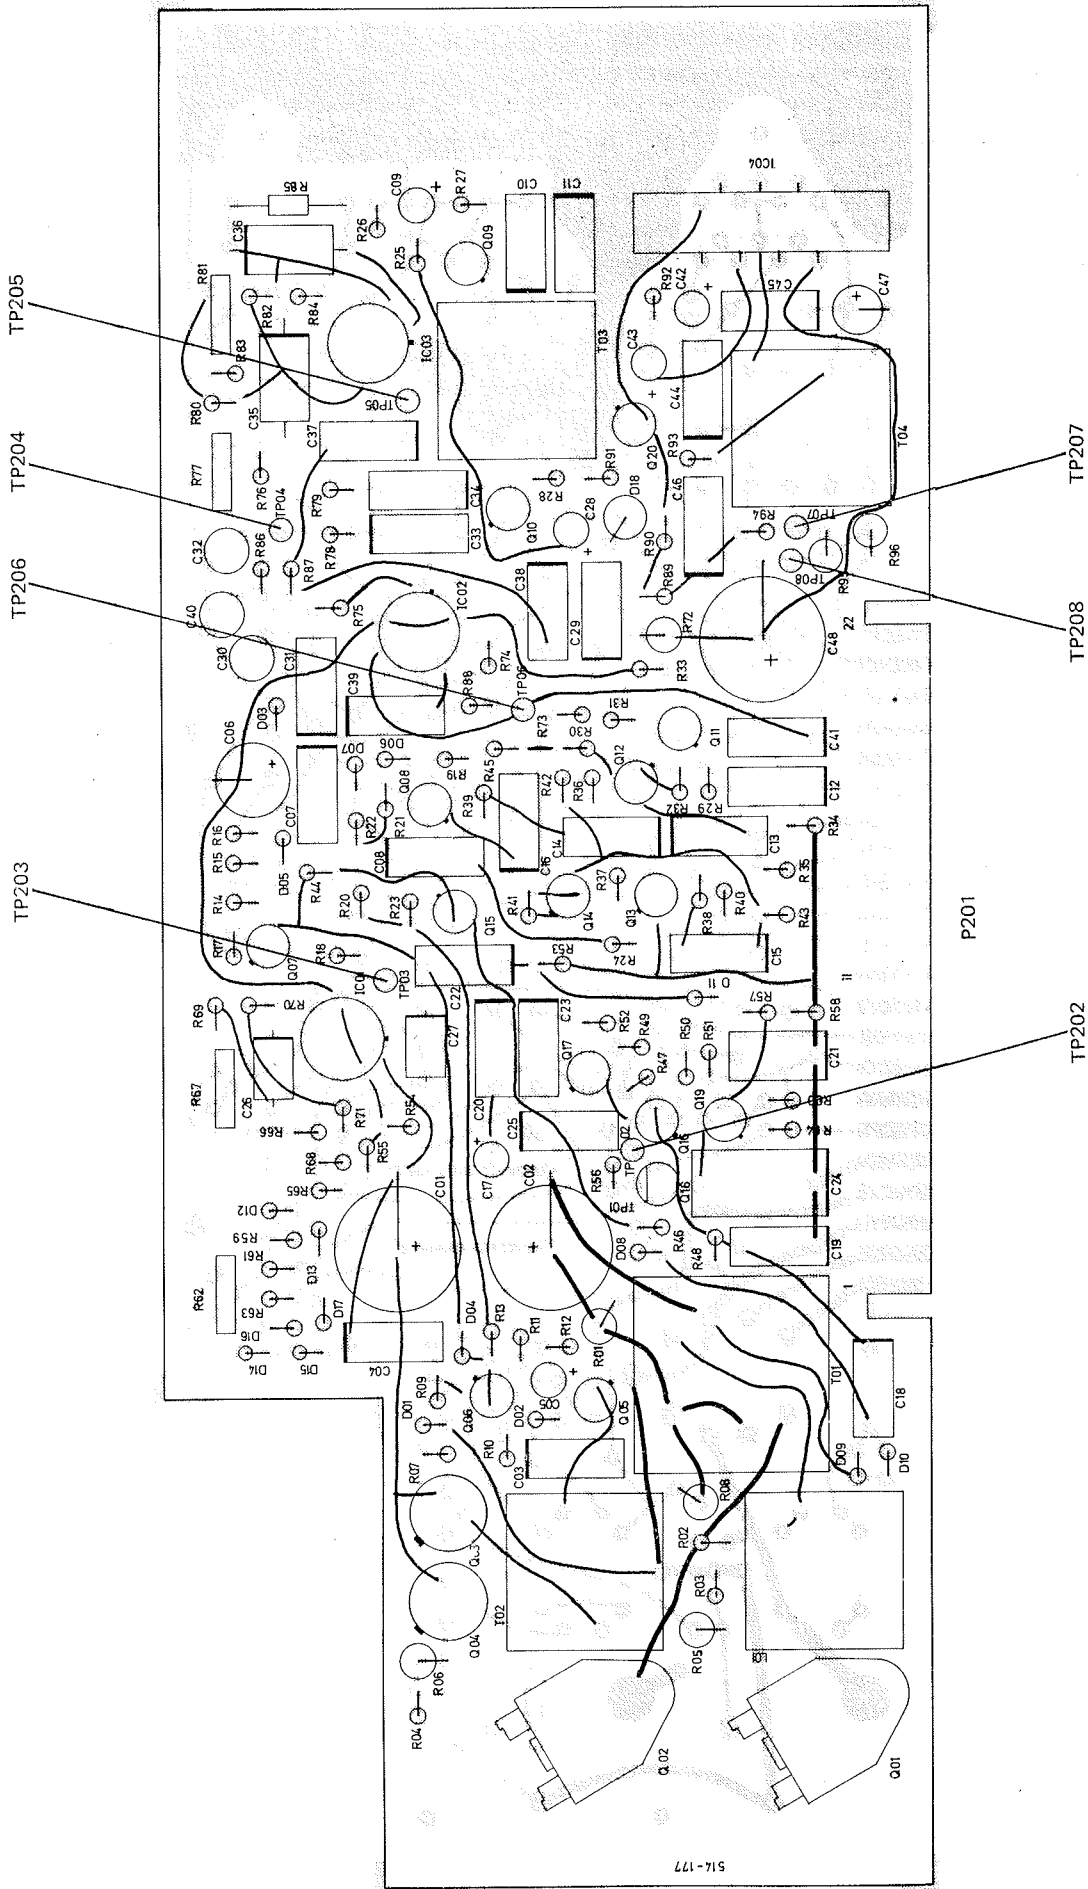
SIMRAD EL-N, transmitter-receiver PCB 382 - 009405.2. Test points and component layout.
